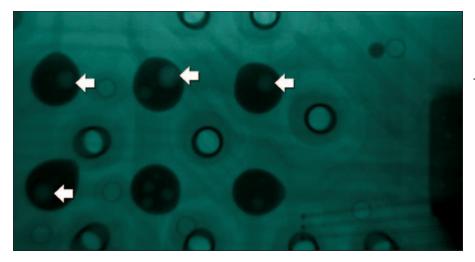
X-ray image of voids in the solder joints of a BGA assembly.
